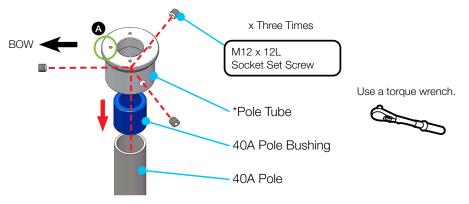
Installing 40A Pole Bushing inside Pole Tube
